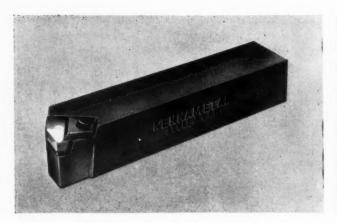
Planer Tool with Clamped-on Carbide Tip Designed Especially for Straddle-facing to Square Shoulders
